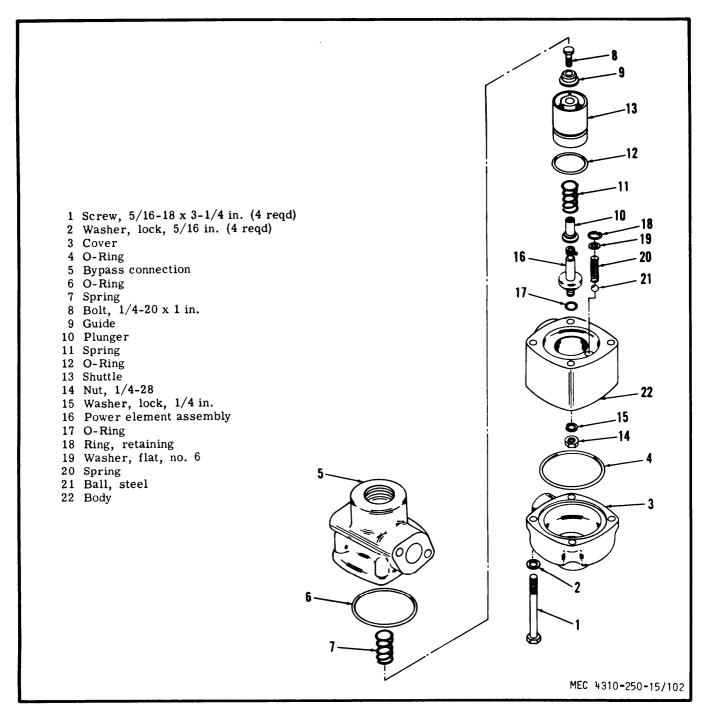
Thermal Bypass Valve Assembly, Disassembly and Reassembly.
